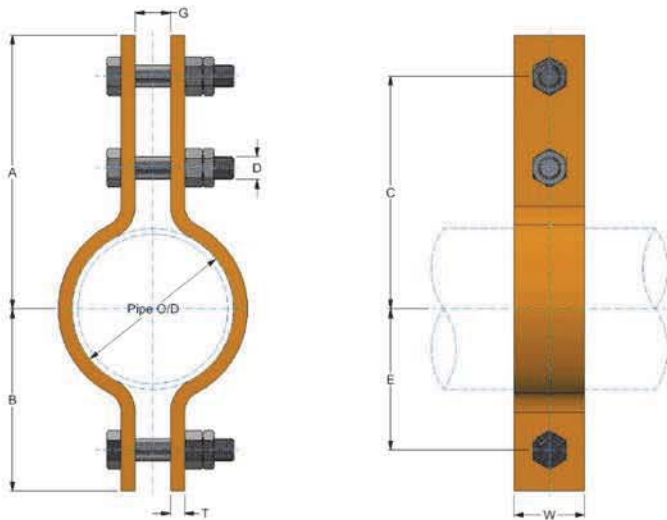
L & 20L – 3 Bolt Pipe Clamp (Light Series)
